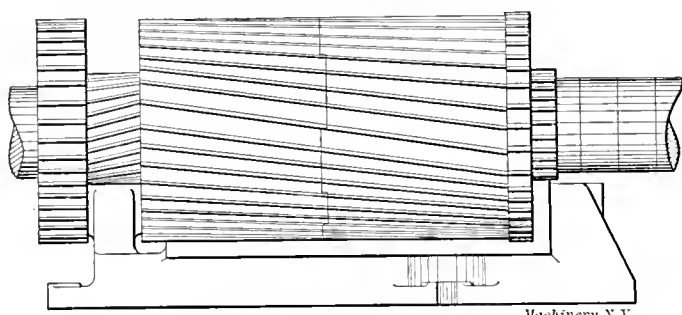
Rough milling the Top of Base, Jaw Top, Jaw Backing and Screw Bosses with Gang Cutter.
